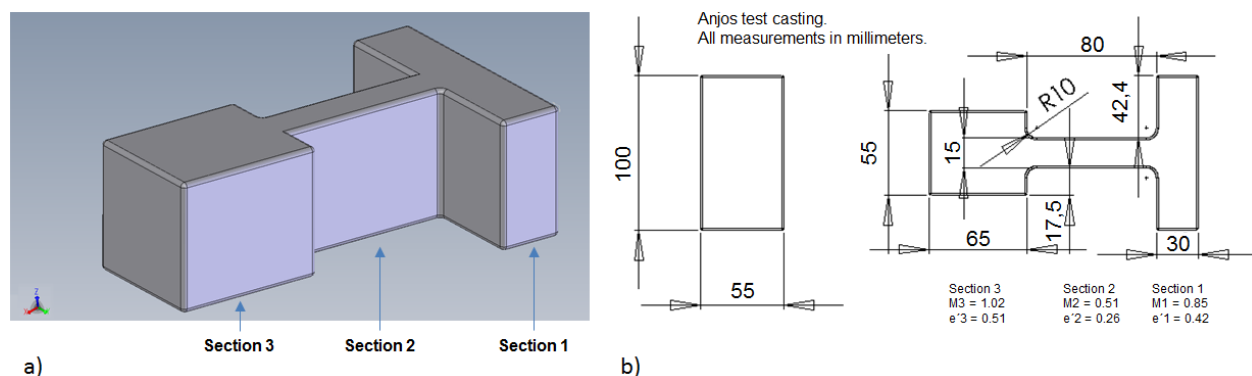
Anjos test casting; a) 3D drawing showing the test casting design as identification of the different sections; b) technical drawing showing the measurements of the test casting part to create a model. Drawings made using SolidWorks software.
